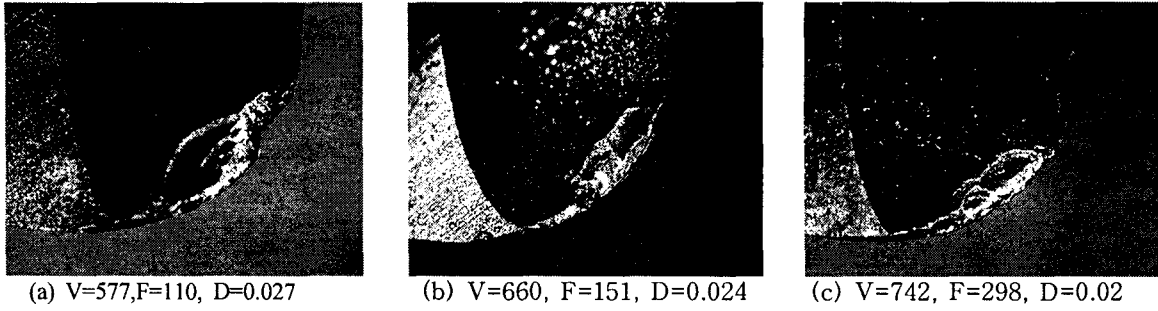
Photographs of the tool wear of the end mill in relation to the Experimental condition
